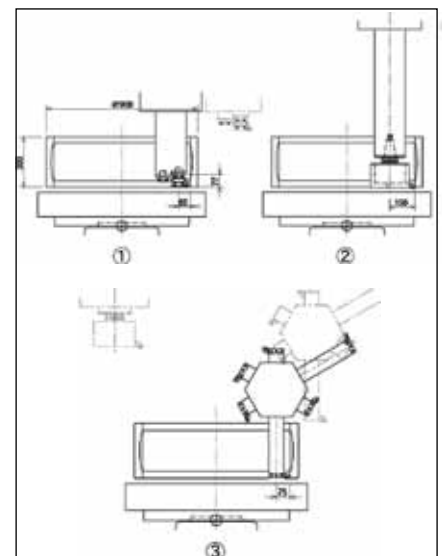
The VTP-1000's tool holder on the Z-axis tip accommodates two tools.
